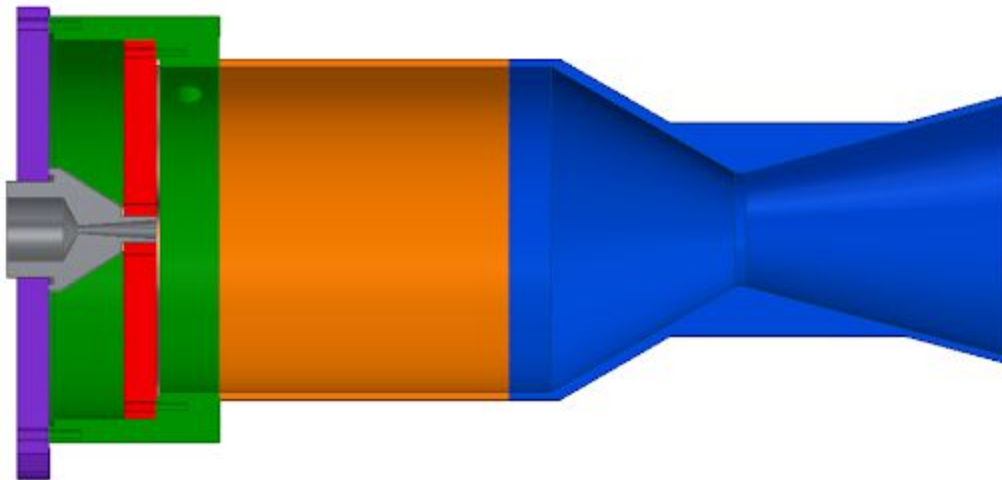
Rocket engine cross-section, injector faceplate in red[1]
